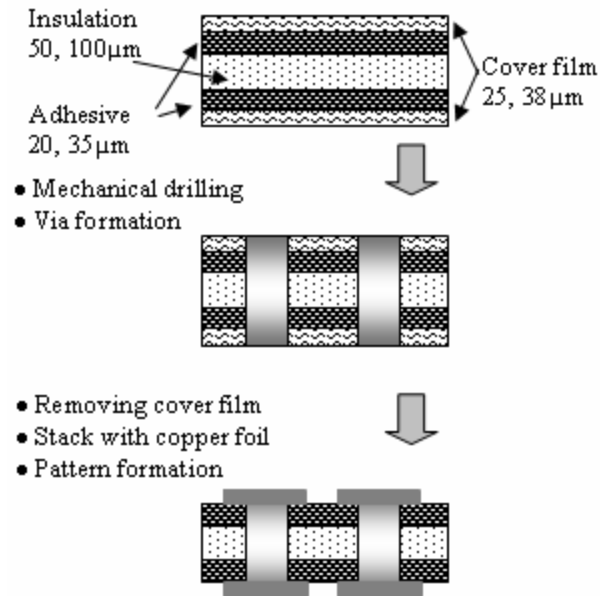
Unclad Board with Double-Sided Adhesive Layer and Cover Film
